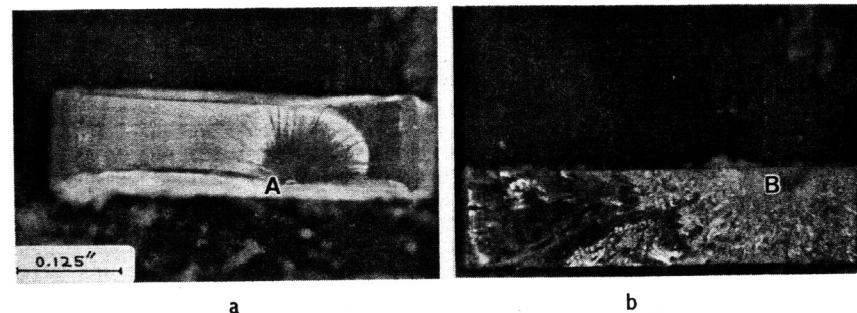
Fracture surface of 1/8" thick PC samples (a) Ductile and (b) Brittle.
